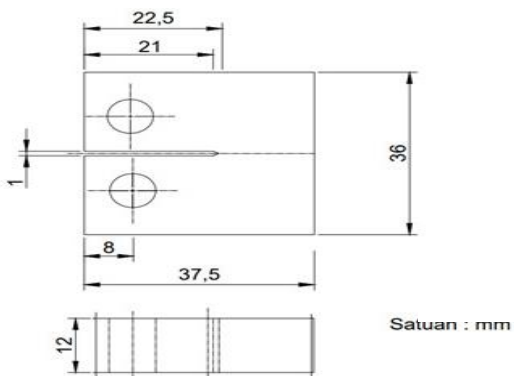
Crack testing specimen according to ASTM D 5045 standard
